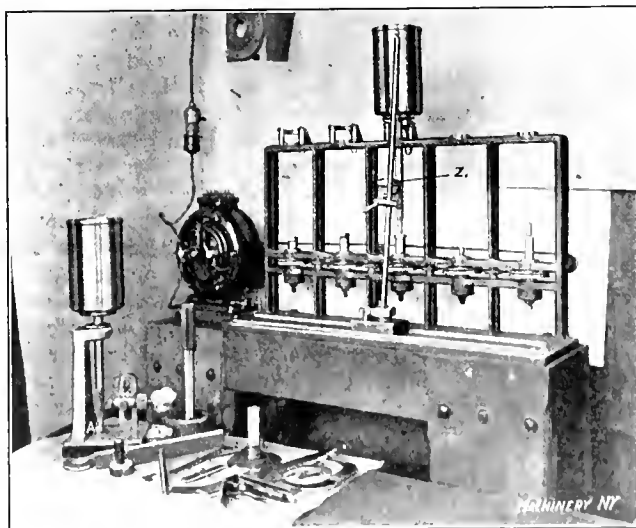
Testing Outfit for Inspecting the Bowls and Spindles
